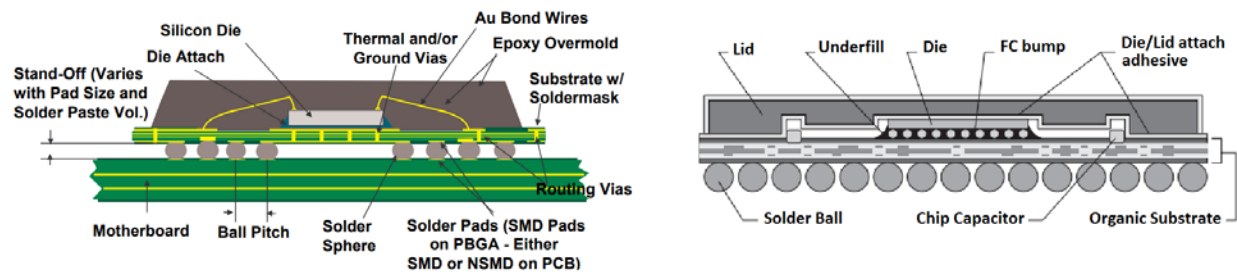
Cross-section view of a) PBGA (left), b) Flip chip BGA (right)
